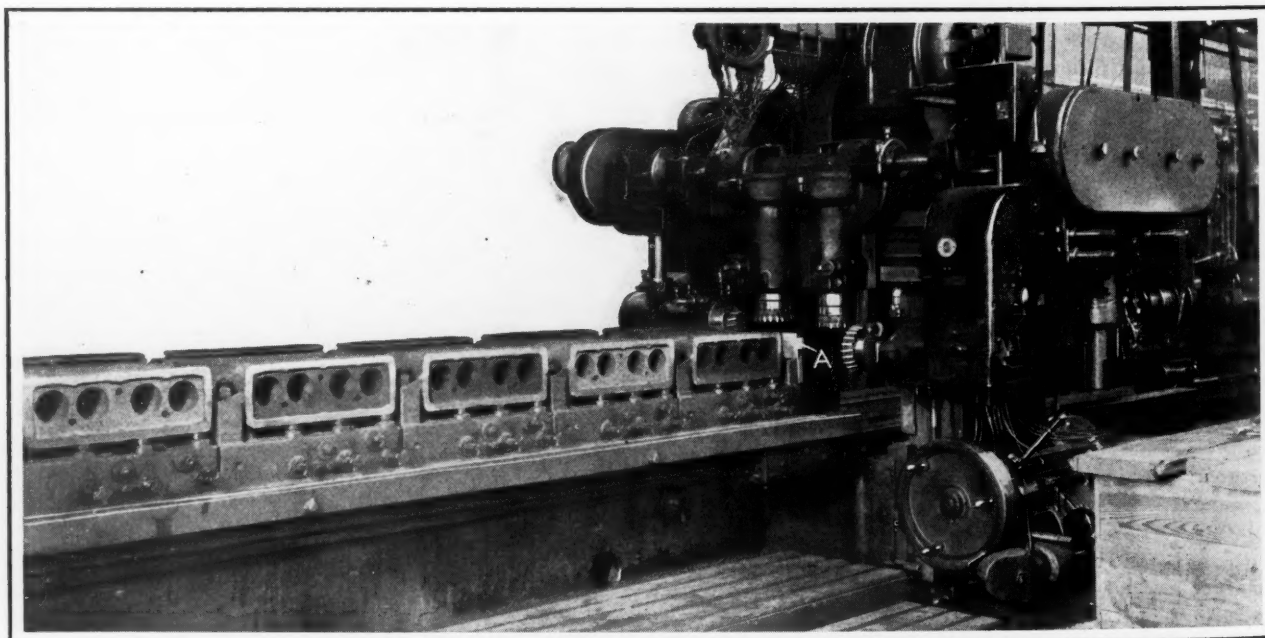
Milling Machine Employed for Milling the Cylinder Blocks
